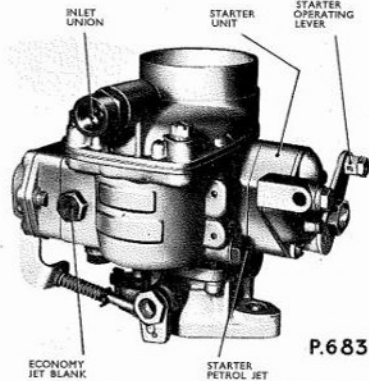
Front view of the carburettor, showing the jets and starter unit.
